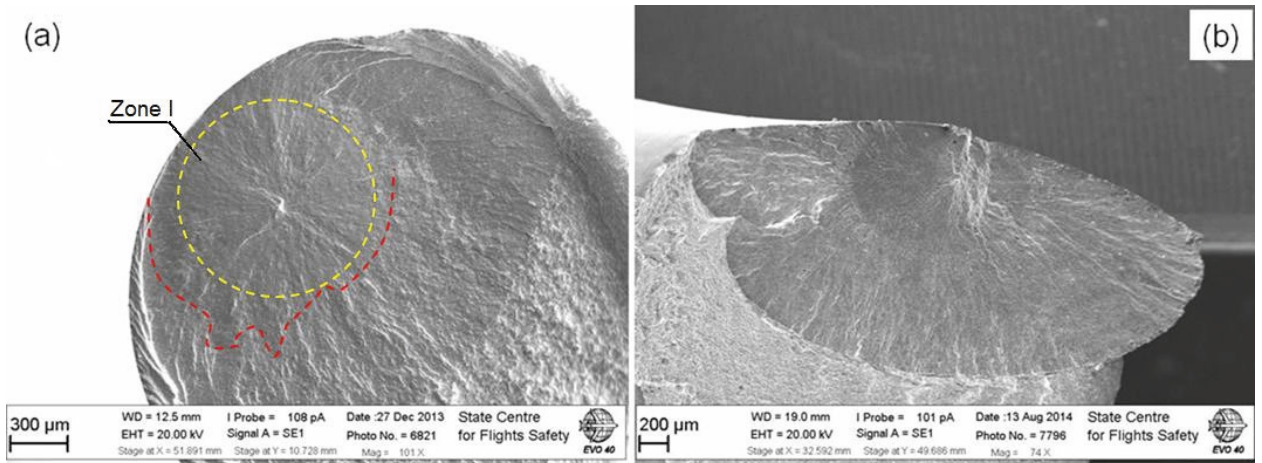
Fracture surface with subsurface crack initiation and clear ‘fish-eye’ under (a) tension and (b) torsion fully reversed loadings.
